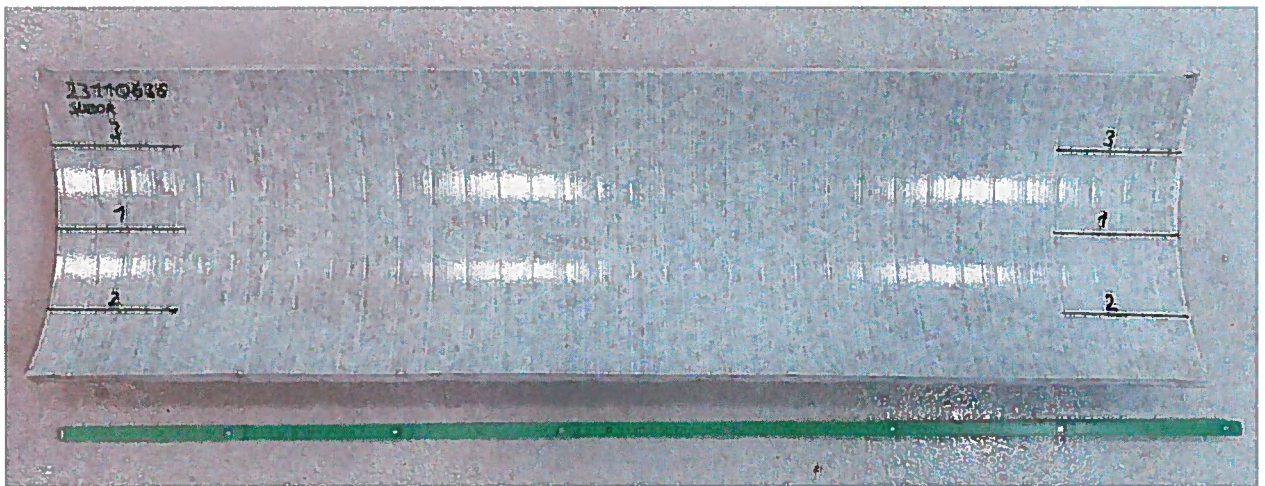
Inner surface of the "SUBOR GRP pipe" after the high-pressure flushing test
